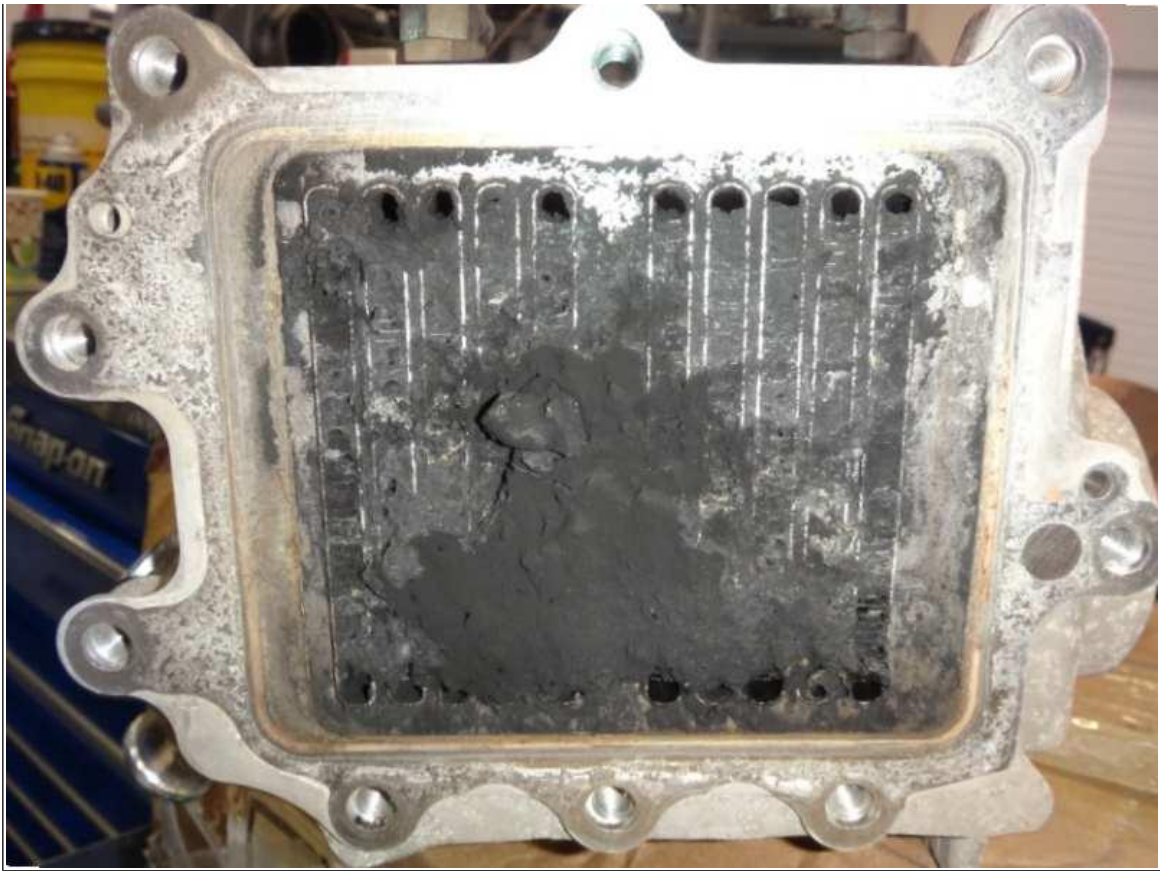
EGR Outlet Cover, Bolts and Tubes
